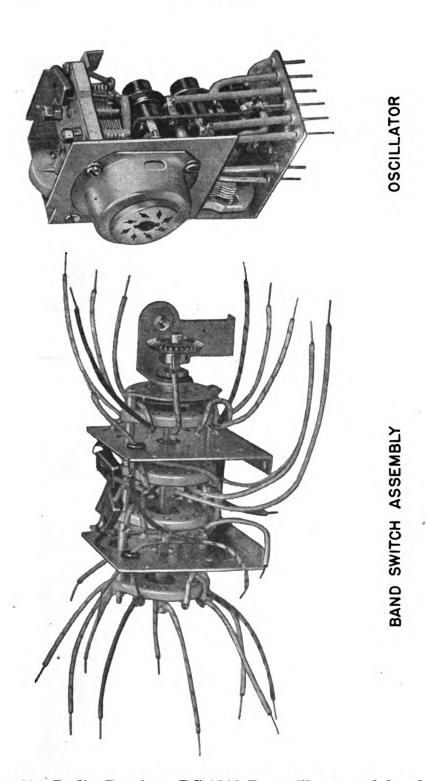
Radio Receiver BC-1003-B, oscillator and band switch assembly, rear view.
